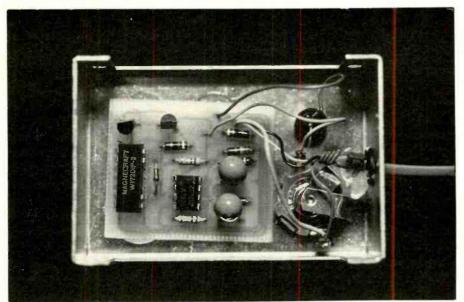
Circuit-board assembly, pushbutton switch and LED mounted inside separate box, with 3-conductor cable connecting them to smoke detector.
